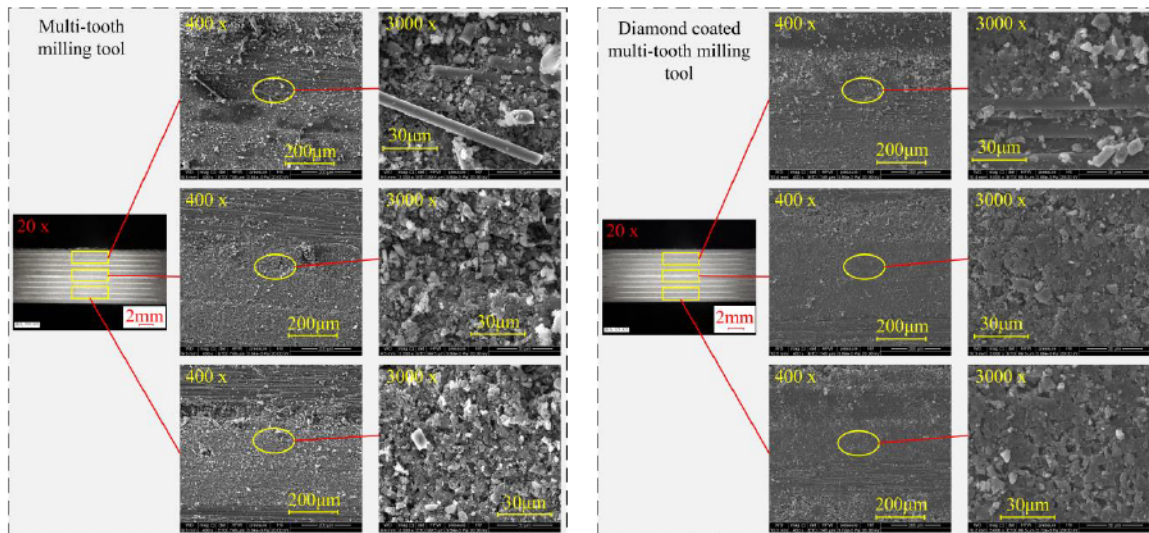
The machined surface of the CFRP workpiece with different tools (milling length: 1.7m)
